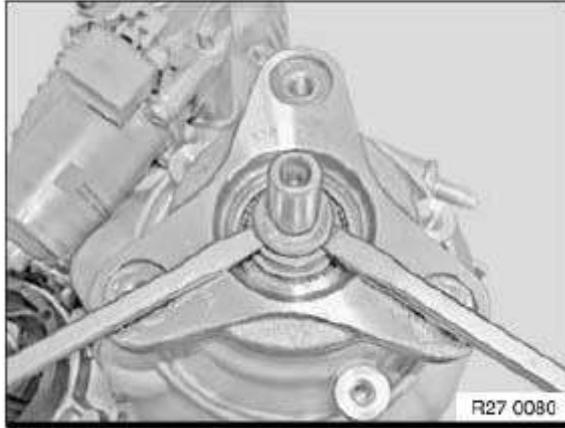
Pressing Down Output Flange Using Screwdrivers
